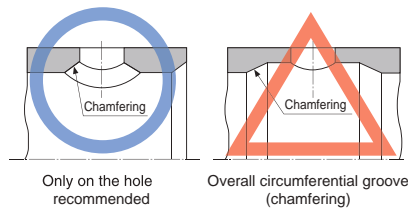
Chamfering of re-lubricating hole on the housing
